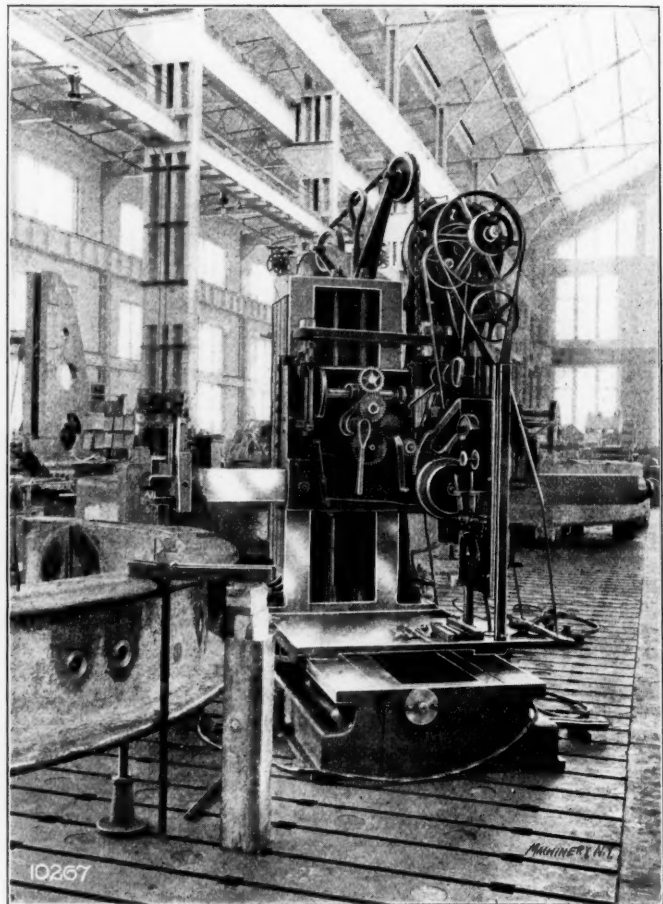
Draw-cut Shaper; may be Used for Surfacing either Vertical or Horizontal Surfaces.
